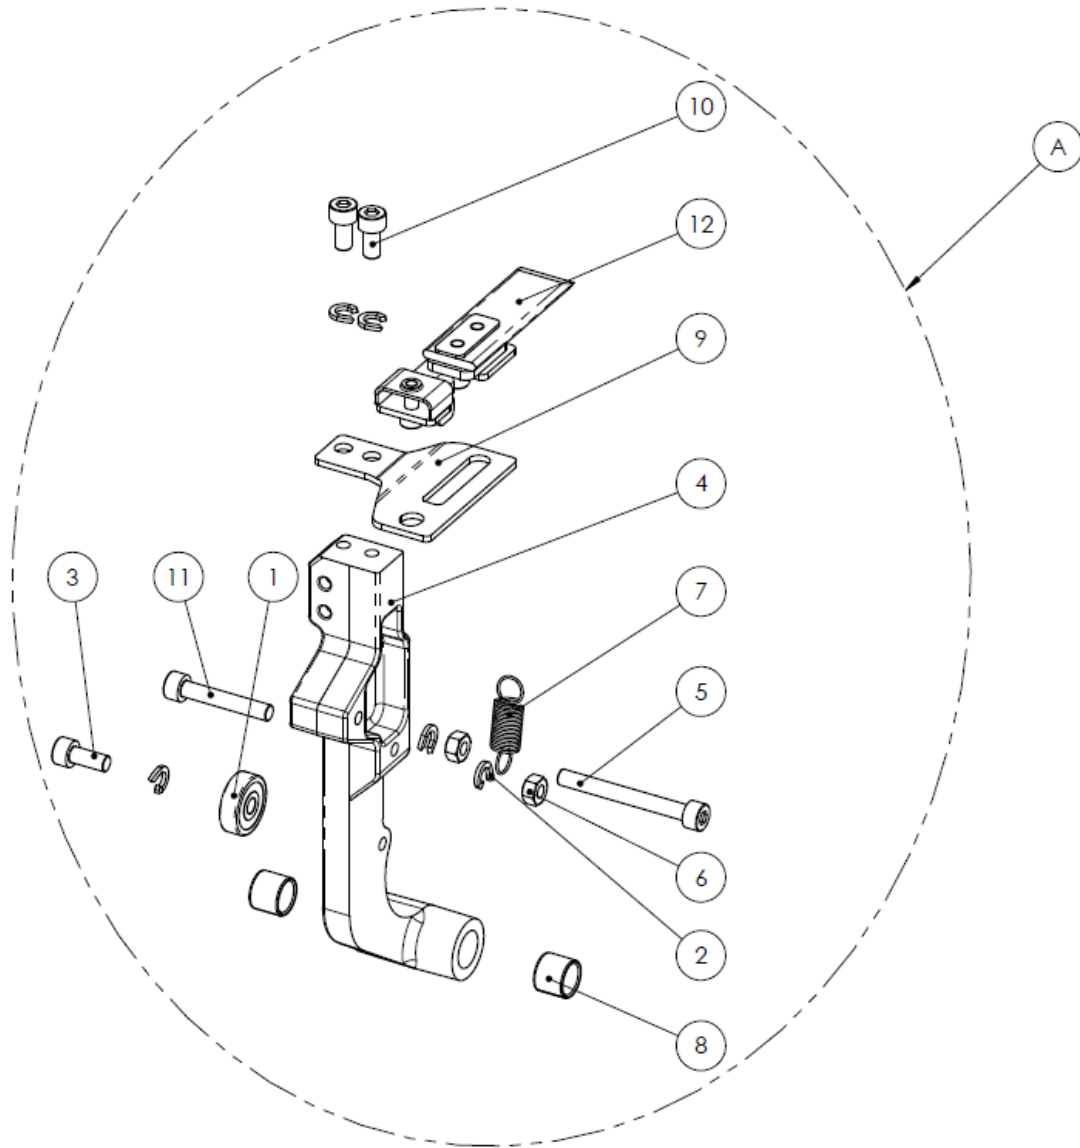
Separating Plate Unit 5030530/P02-0394400
